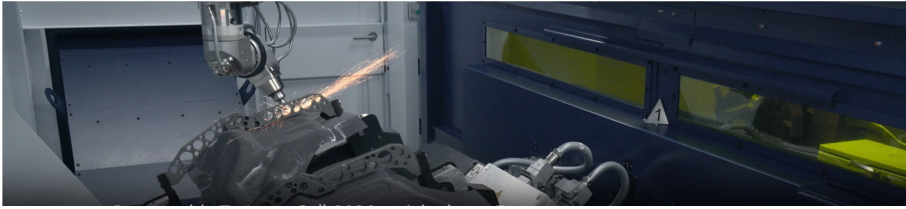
2D cut test on TRMMPF TruLaser Cell 8030 machine system.
